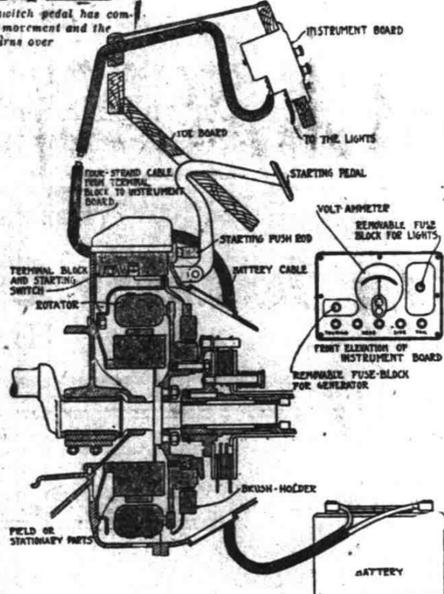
Section through assembled U. S. L. system. The parts shown in white are furnished by the maker of the car; those in shaded areas, by the U. S. L. company
